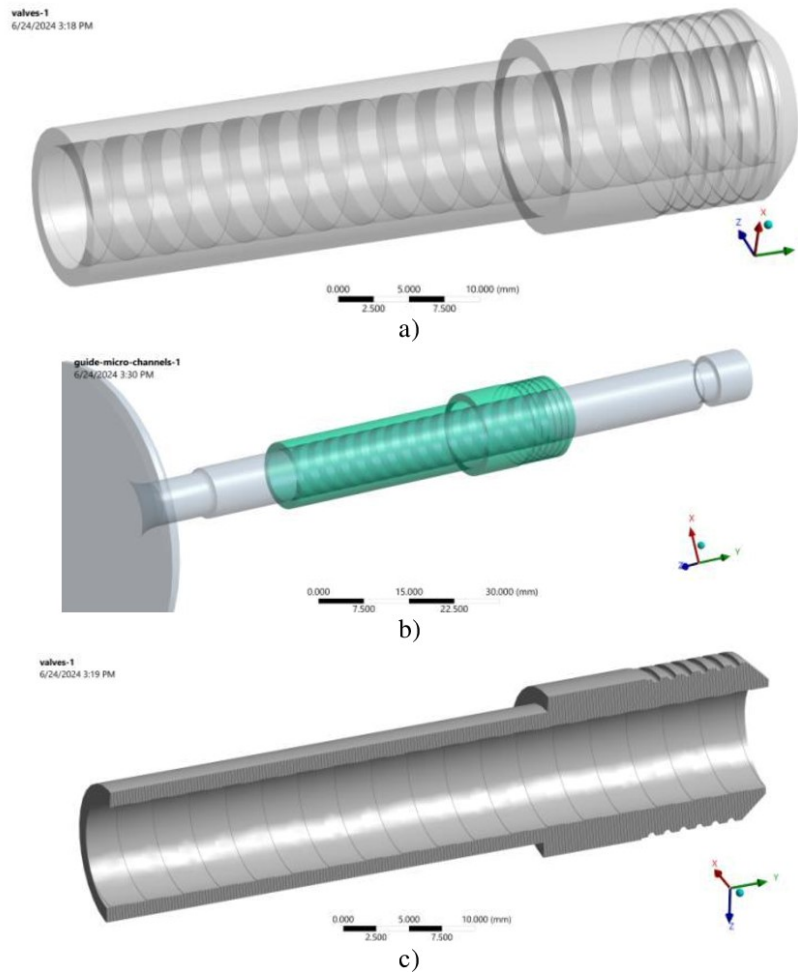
Solid model of a guide with channels: a, b) guide separately and assembled with a valve; d) cross section of the guide
